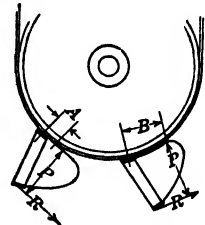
Pull on Bucket Bolts Dependent on Shape of Bucket.
